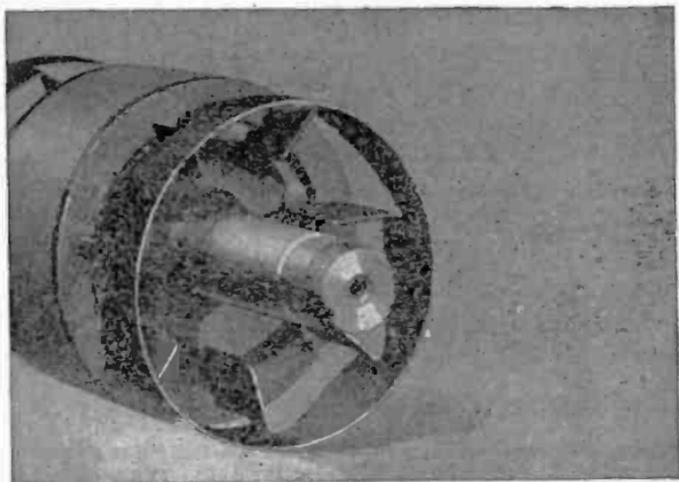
,550.—*Reliance induction motor construction 14.* Blowers are made from one piece of heavy annealed steel. Each individual blade is securely arc welded to the armature so that the blades are held rigid at both ends. The cylindrical shrouds strengthen the blades against centrifugal and axial forces and minimize vibration.
